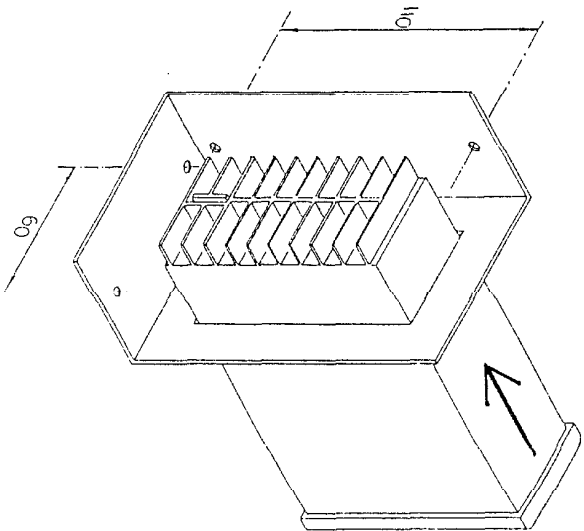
CHASSIS MOUNTING BRACKET
